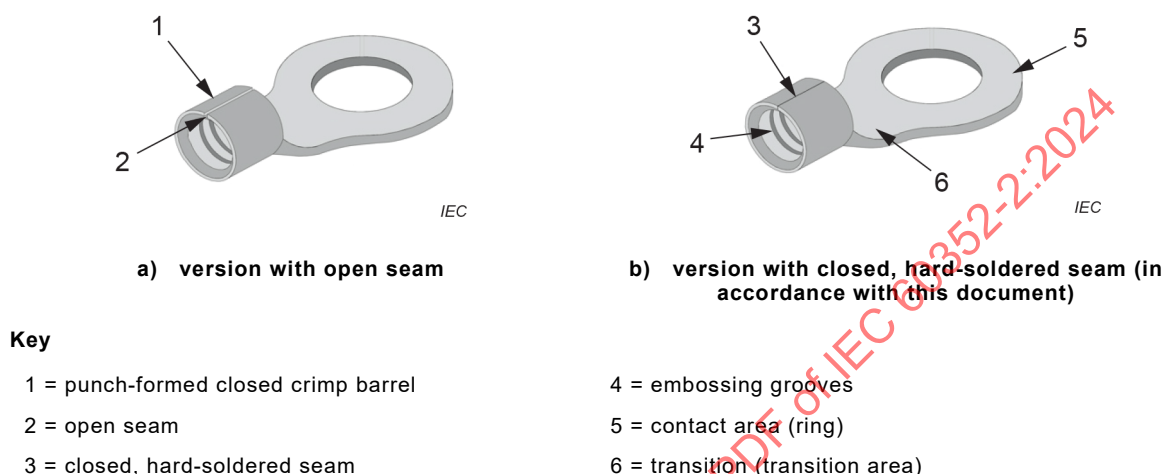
Stamped closed crimp barrel (crimp cable lug)
